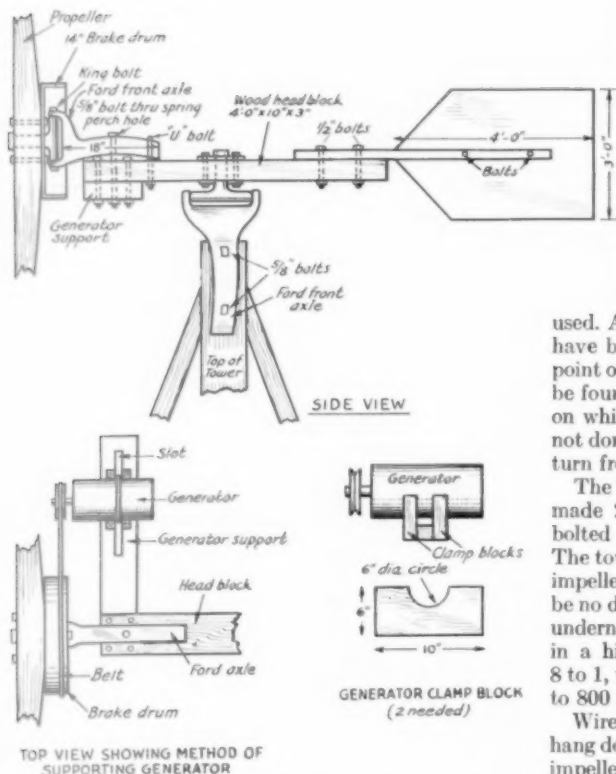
CONSTRUCTION OF THE WIND-DRIVEN CHARGER BUILT BY RODNEY C. MITCHELL
